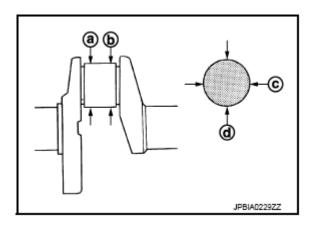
Identifying Crankshaft Out-Of-Round And Taper Measurement Points Courtesy of NISSAN NORTH AMERICA, INC.
